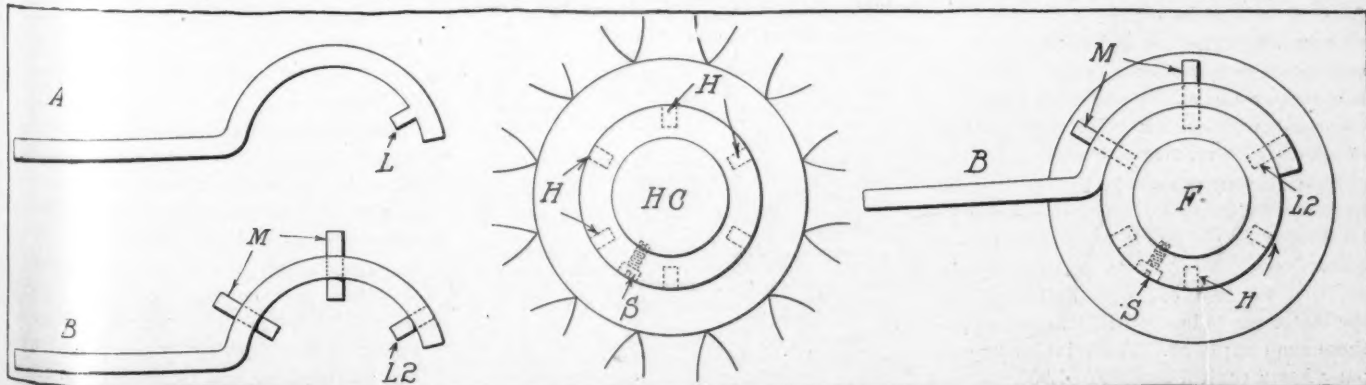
CARE NECESSARY IN REMOVING A HUB CAP
